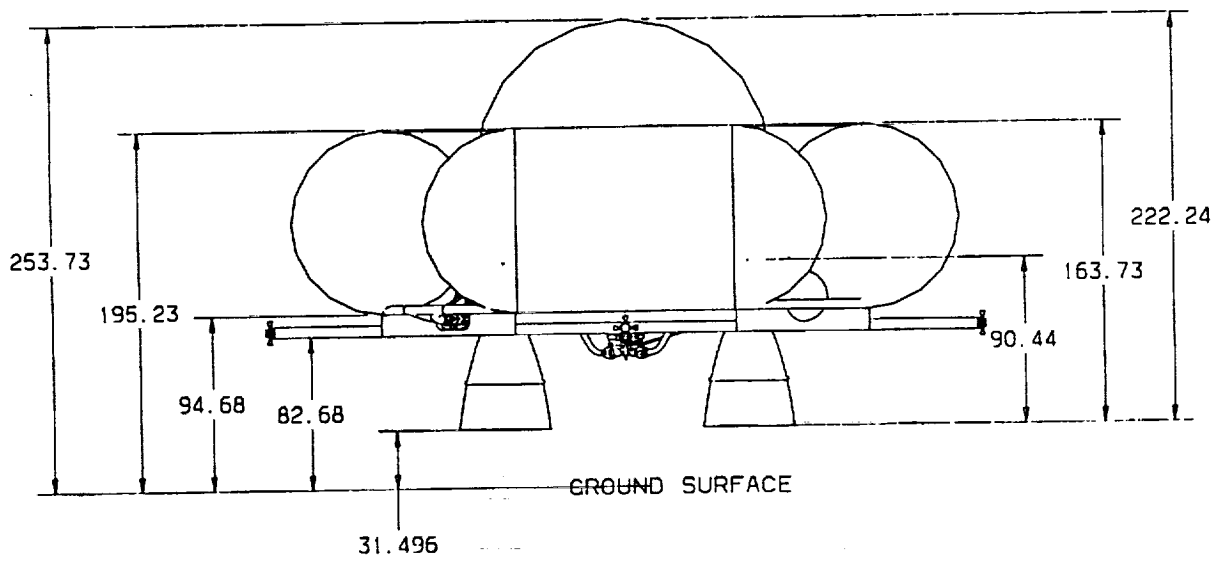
Design Concept A -- Dimensions (Inches)
